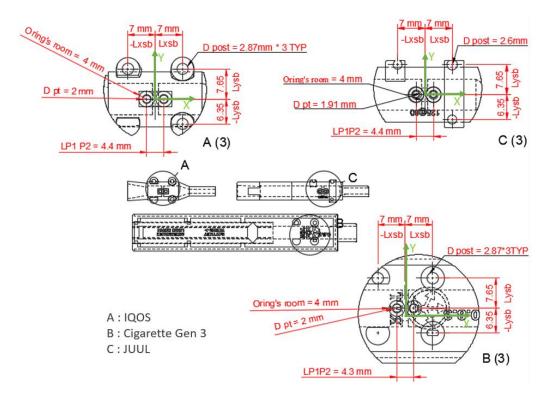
Sensor Board Seating (Top View) for IQOS, Cig Gen 3, and JUUL
